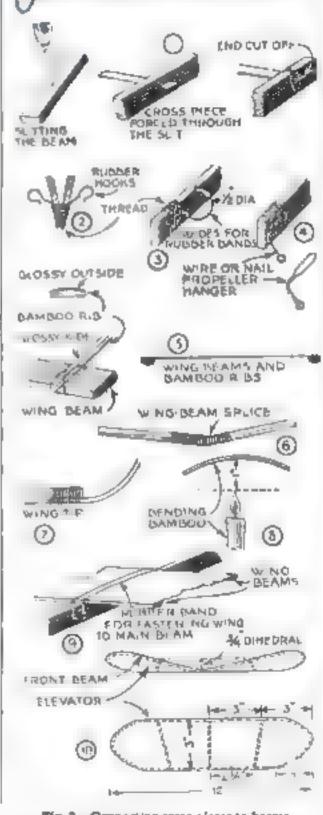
Connecting cross pieces to beams making wire fittings, and other details.
